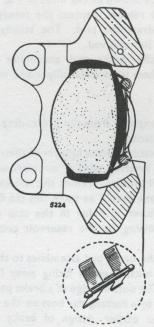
Section through caliper (early type of brake pad and retaining pin shown)
